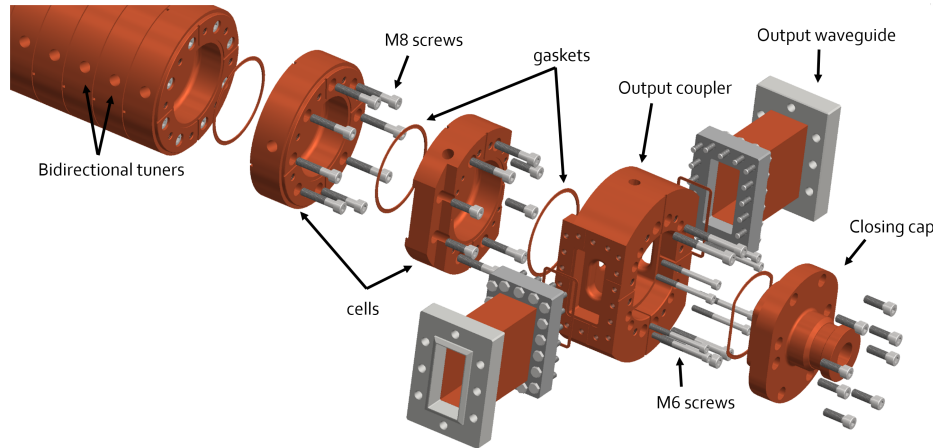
Mechanical drawing of the 10 cells S-band prototype: detail of the assembly procedure.
